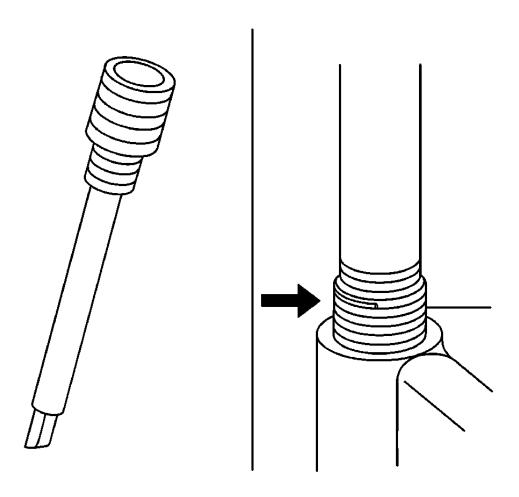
Installing Thread Insert Courtesy of GENERAL MOTORS CORP.
